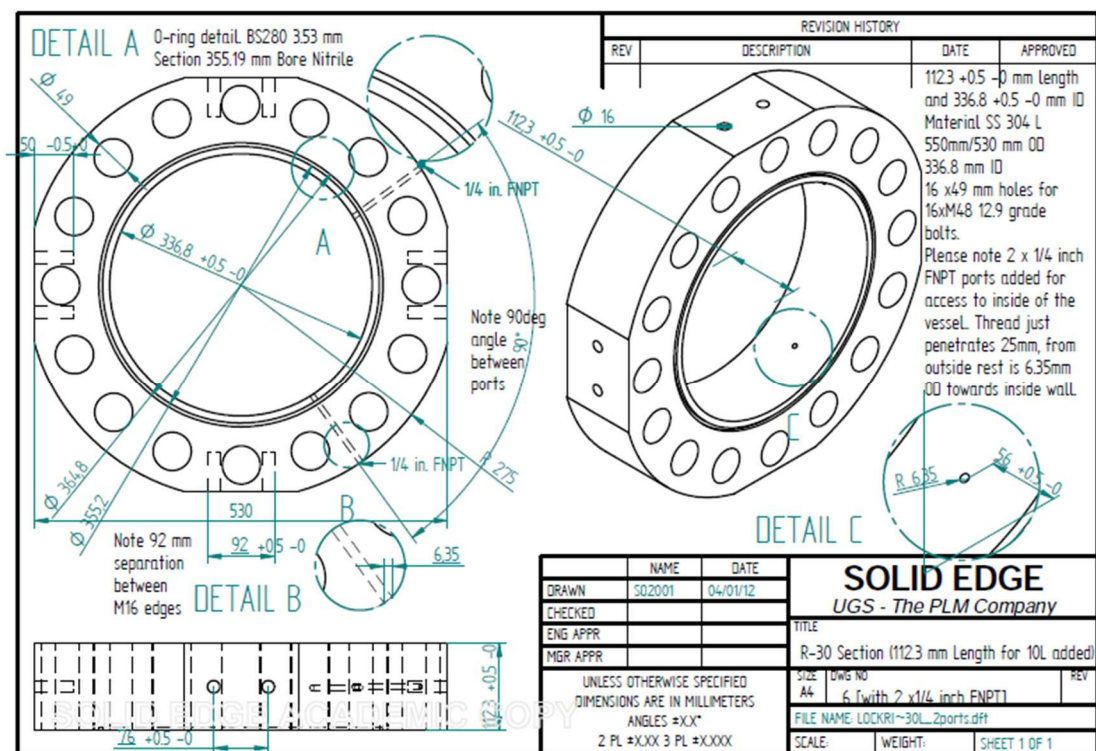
Detailed drawing of final design for half of R-30 ignition chamber with dimensions in mm.
